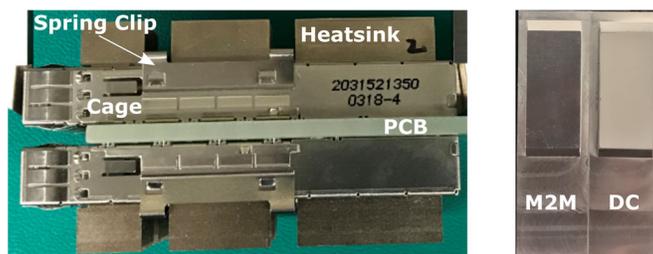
Side view of QSFP-DD POM, cage, and spring clip assembly (left). Heat sinks with durable coating (DC) and without (M2M) (right).
